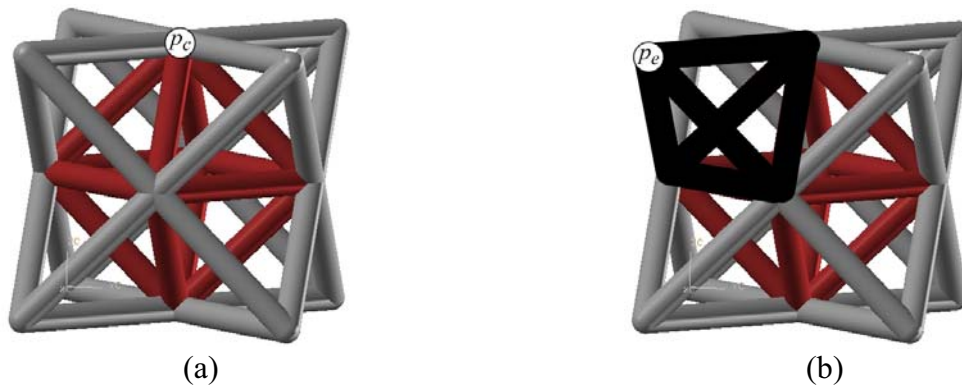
(a) Octahedral section of the octet-truss structure (red inner section) and (b) octet-truss structure with highlighted a corner tetrahedron section (black section).
